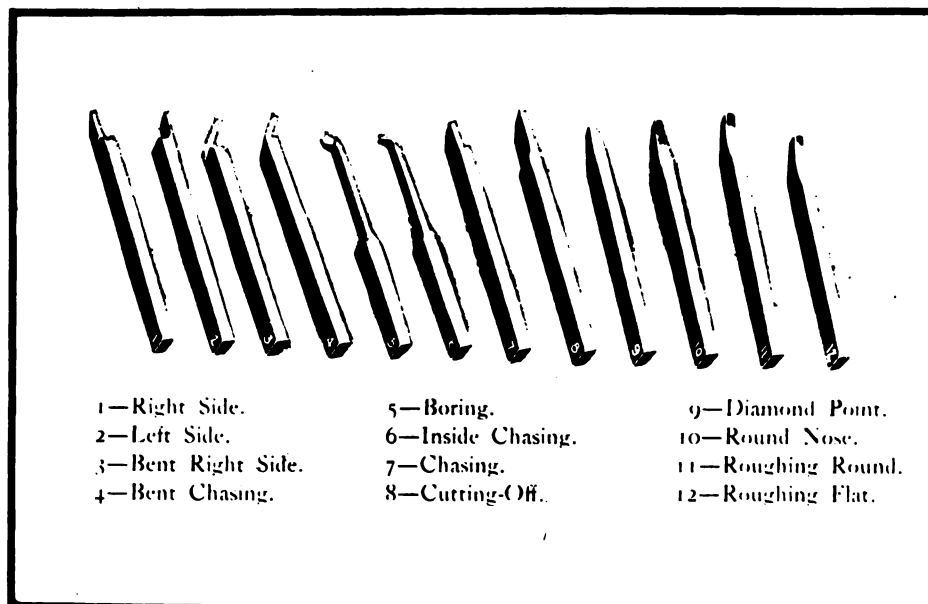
Twelve Different Shaped Tools Which Are Used on the Engine Lathe.
